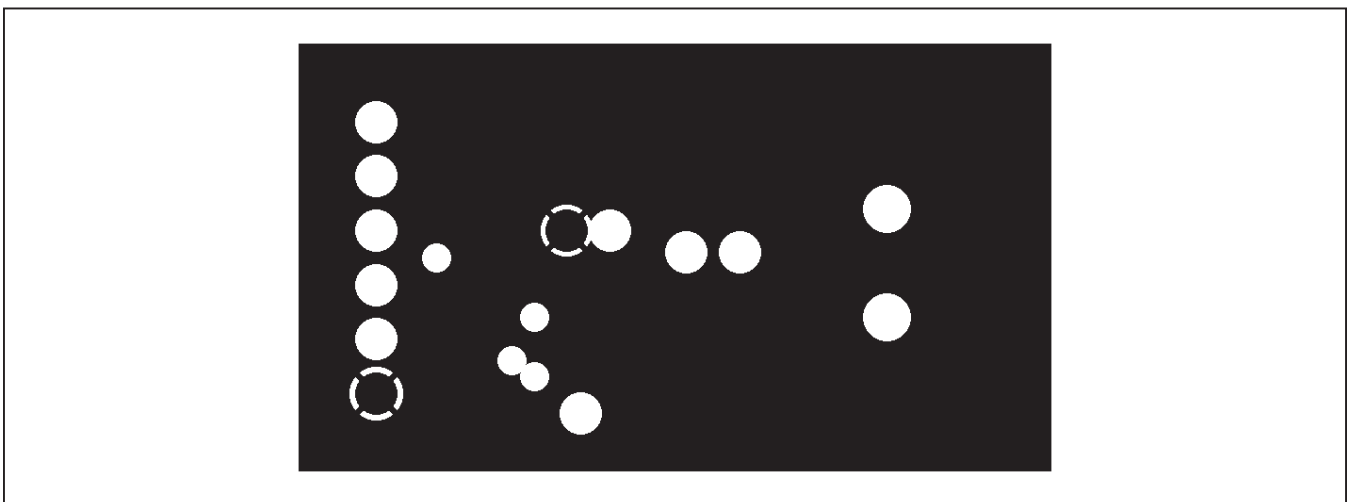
MAX14840PMB1 Peripheral Module PCB Layout—Inner Layer 2 (Power)
